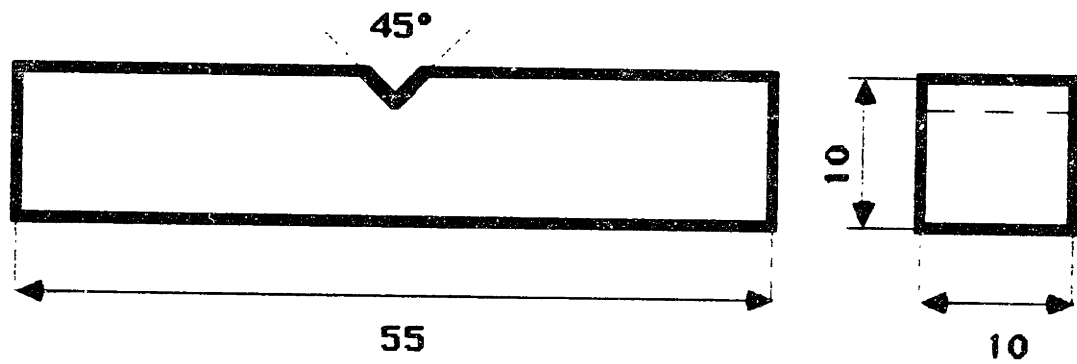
Charpy-V-Notch specimen. Dimensions in mm.
